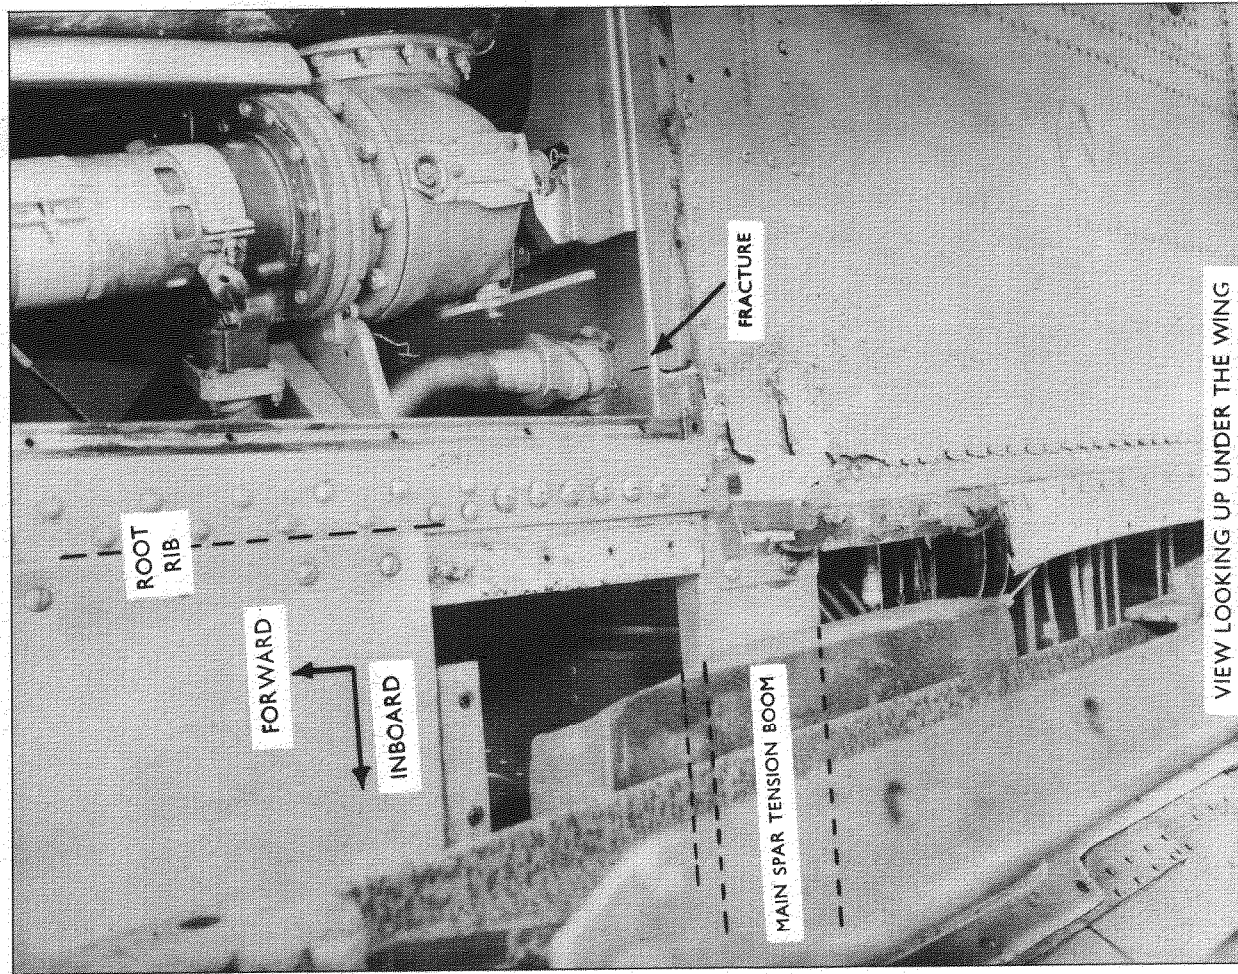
MAIN SPAR TENSION BOOM FRACTURE, PORT INNER WING; 170,500 GUST LOAD CYCLES, FIRST TEST
